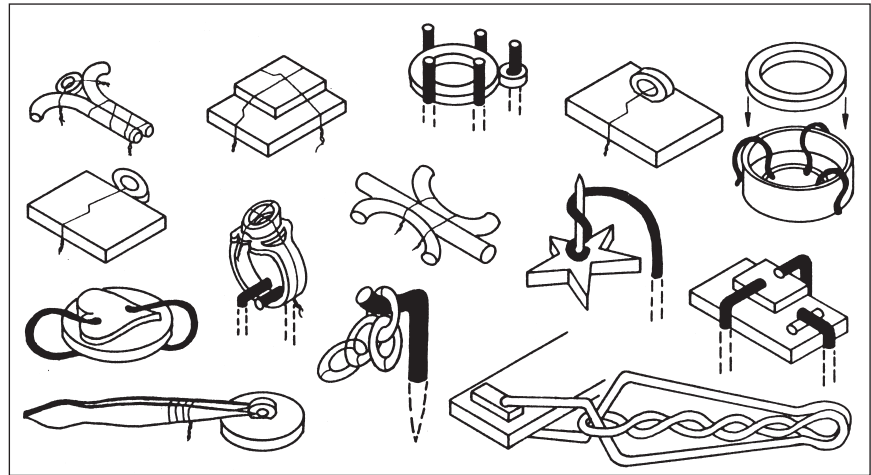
A variety of jiggging and support systems. (Courtesy Murray Bovin, Bovin Publishing, New York 1979)
